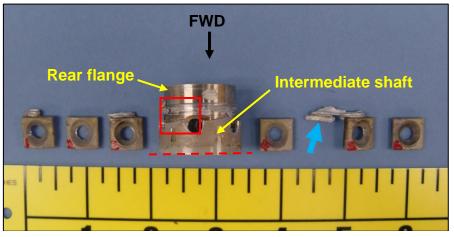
The disassembled portion removed from the forward end of the rear drive shaft.
